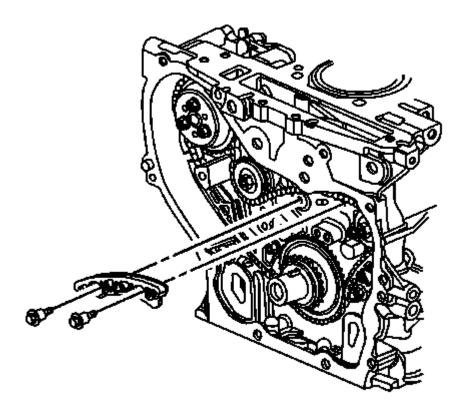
Open Ended Wrench & Actuator Bolt Courtesy of GENERAL MOTORS COMPANY
